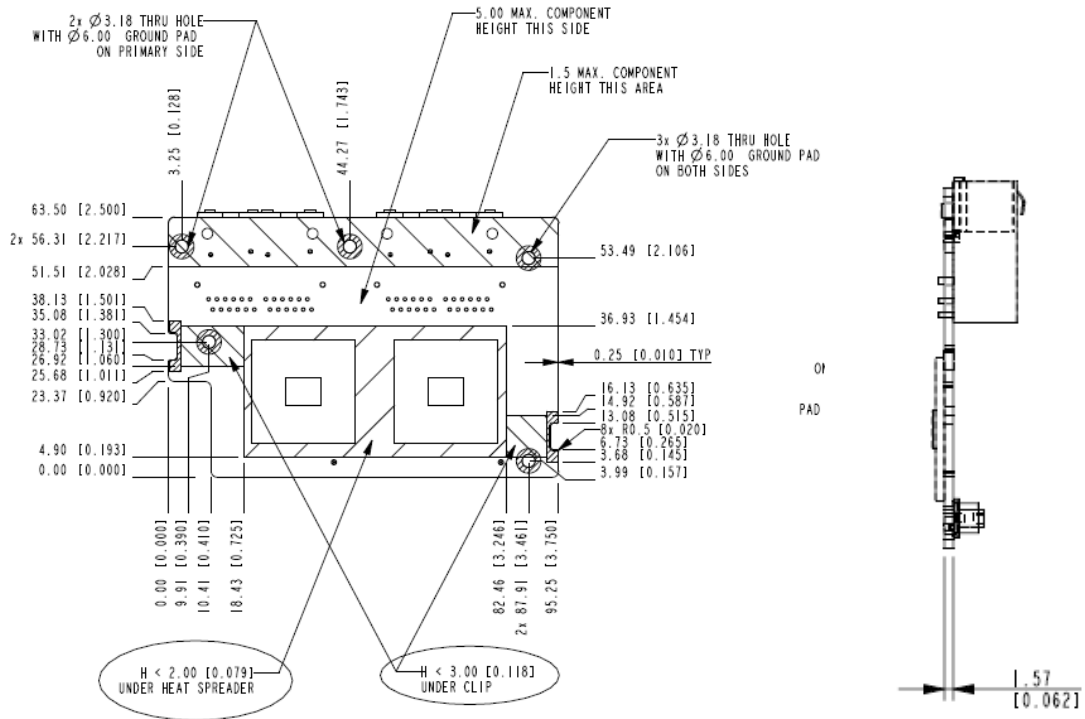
Quad-Port GbE I/O Module Mechanical Drawing
